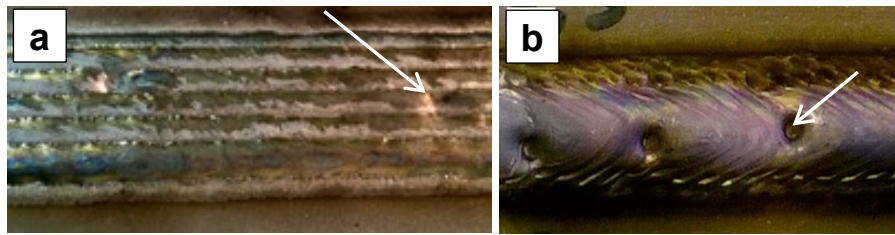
Underfill-type defects in the surface of CMT test claddings, as shown by arrows. a) Adjacent beads with stringer motion, b) single bead with weaving motion [5].
